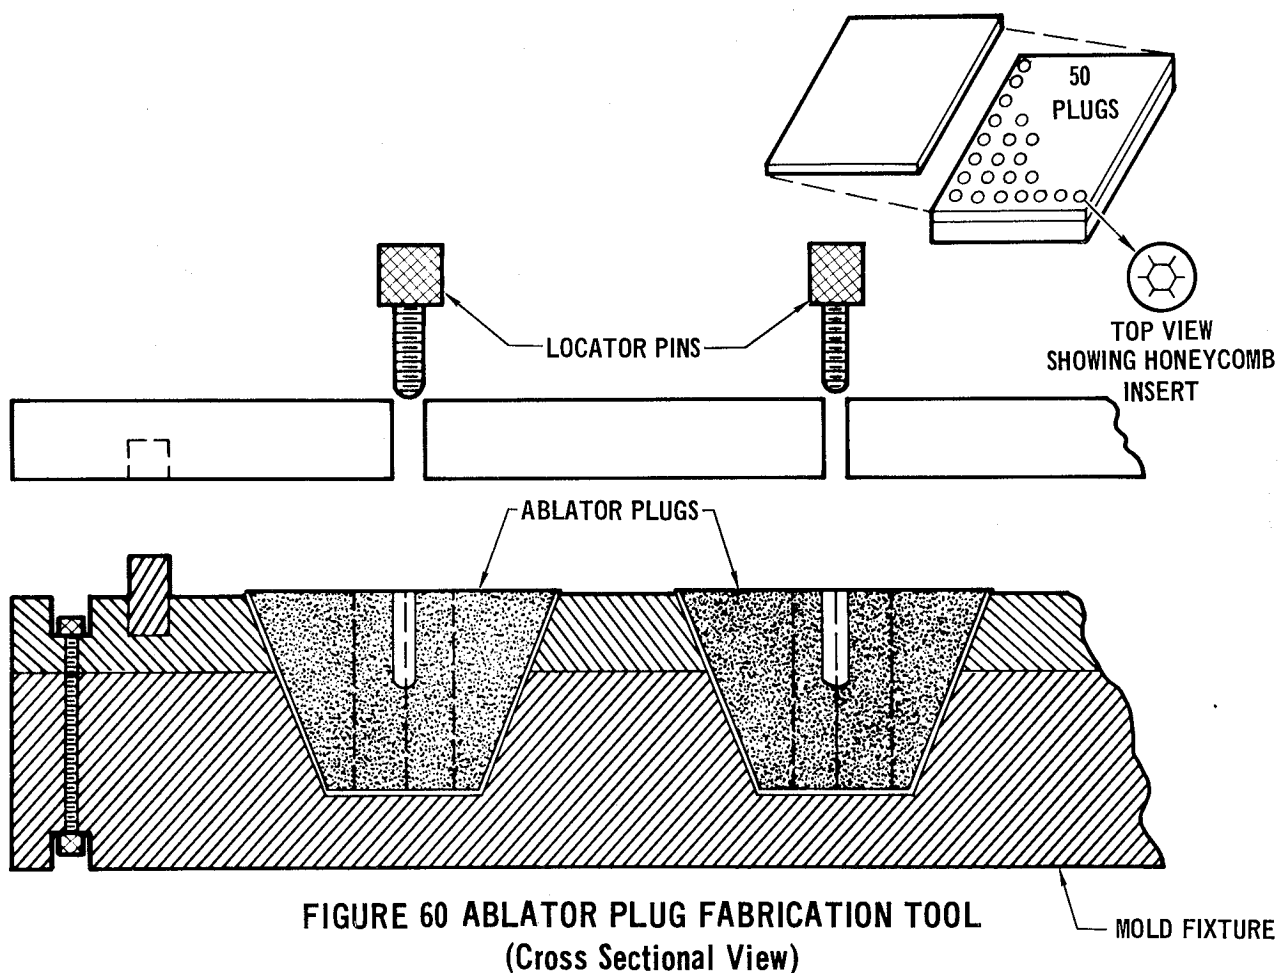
ABLATOR PLUG FABRICATION TOOL
